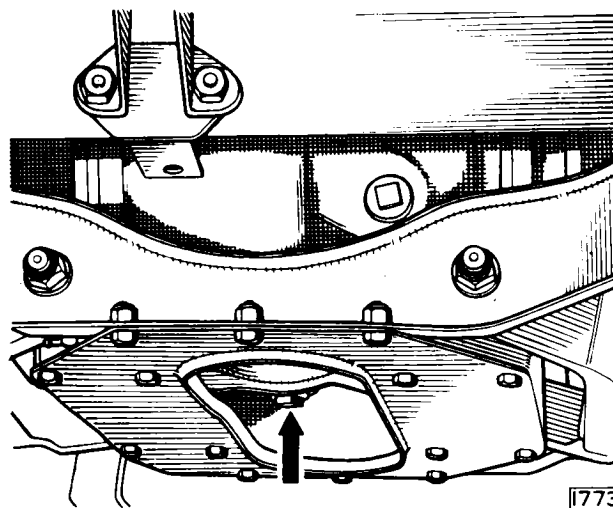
Rear axle drain plug. (The exhaust pipes have been removed for illustrative purposes)
